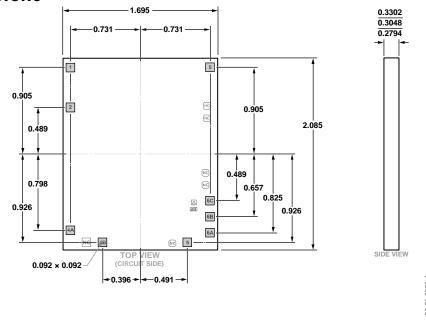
9-Pad Bare Die [CHIP] (C-9-3) Dimensions shown in millimeters
